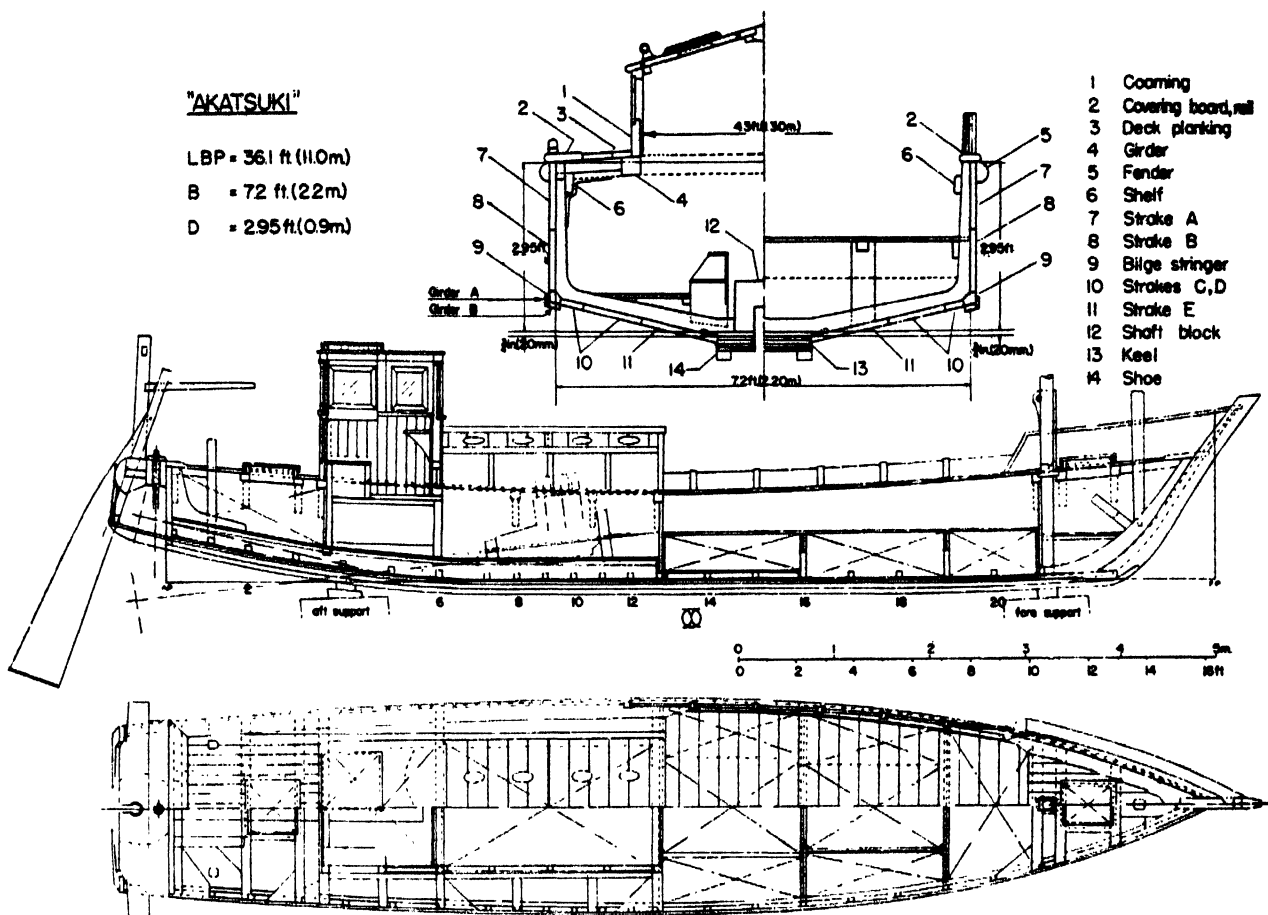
General arrangement of an improved Yamato type, the Akatsuki, with typical wide planking
